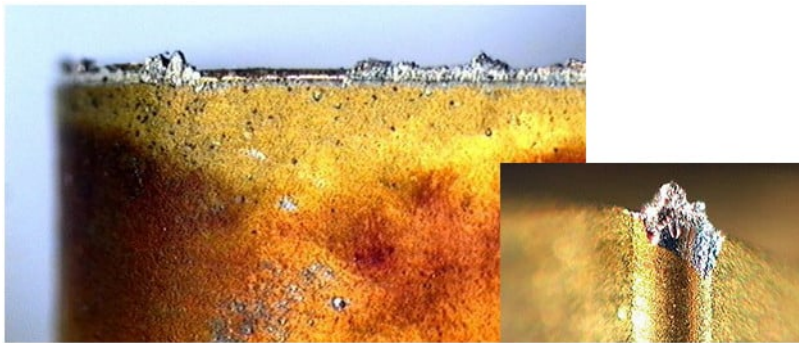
Built-Up Edge Formation on Cutting Tool During Metal Cutting [54]
